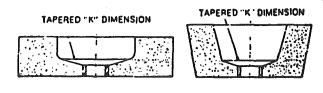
Type 11—Flaring Cup Wheels
